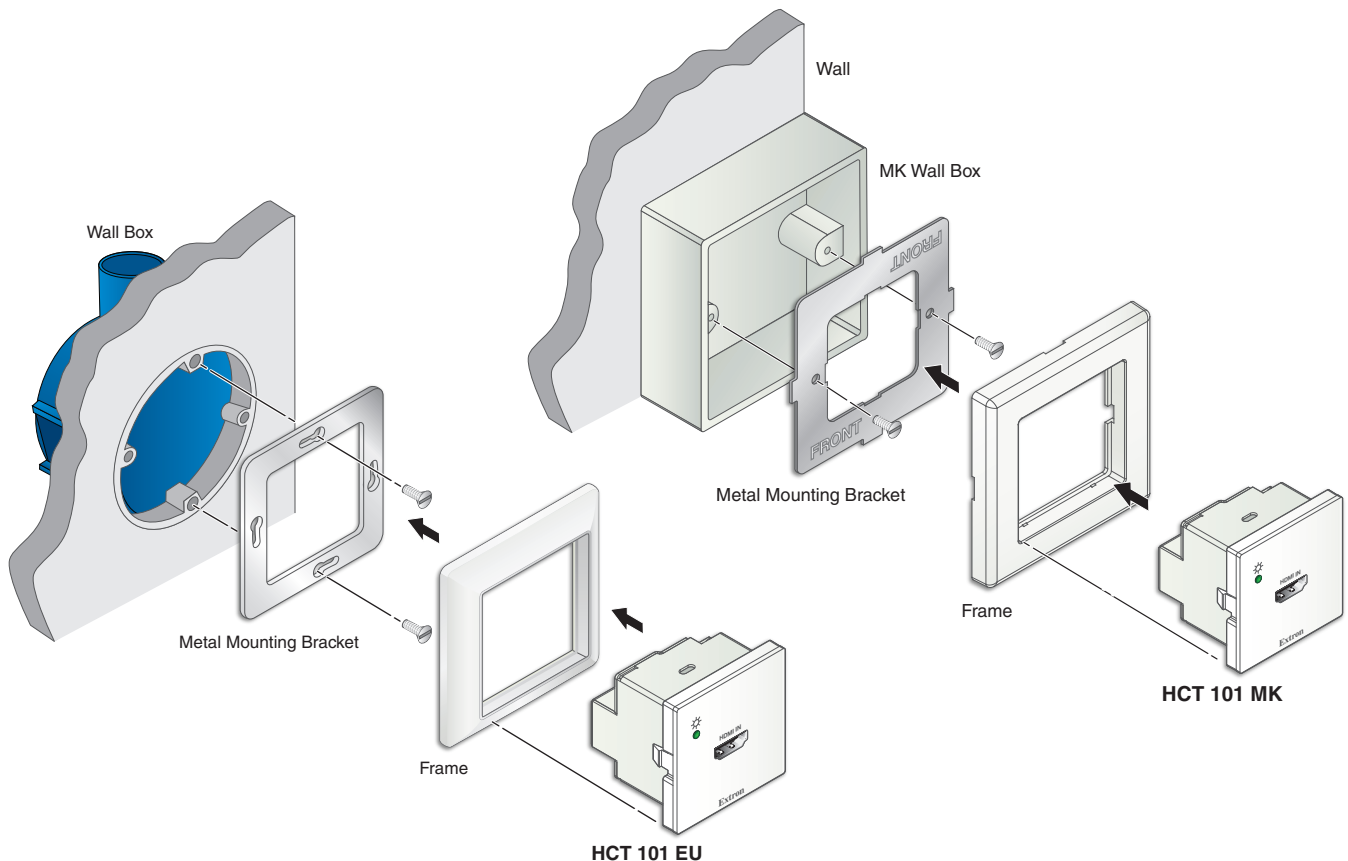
Mounting the HCT 101 EU to an EU Wall Box (Left) and the HCT 101 MK to an MK Wall Box (Right)
